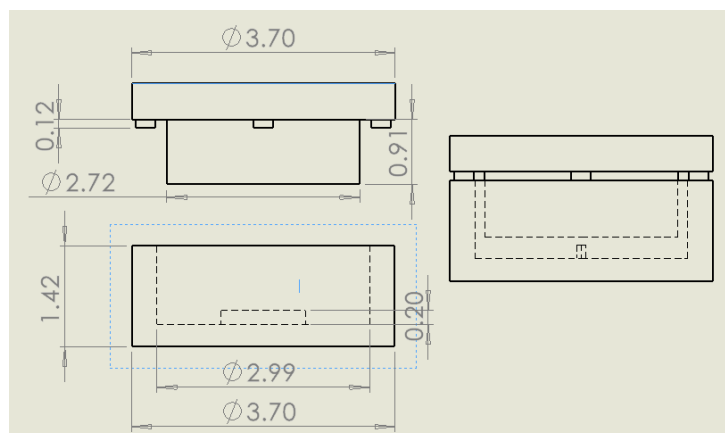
SolidWorks drawing of the final vaginal opening mold which increased the length of the mold and had a pre cut vaginal opening.
